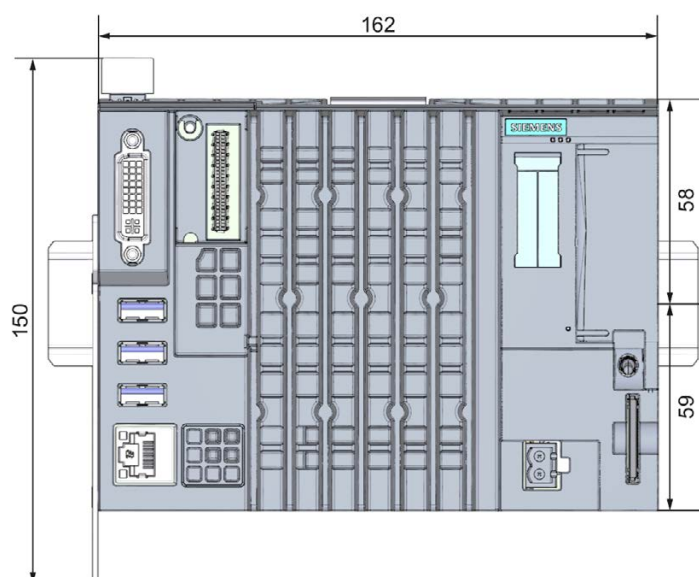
Dimension drawing of CPU 1515SP PC, front view
